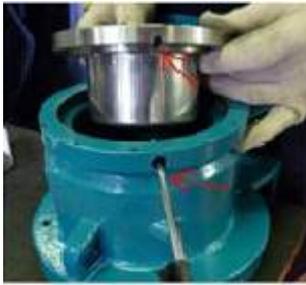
Lock the outer magnet (856) with screw (901.2). Ensure the seal with threadlocker type Loctite 243. Screw in the grub screw (904).
